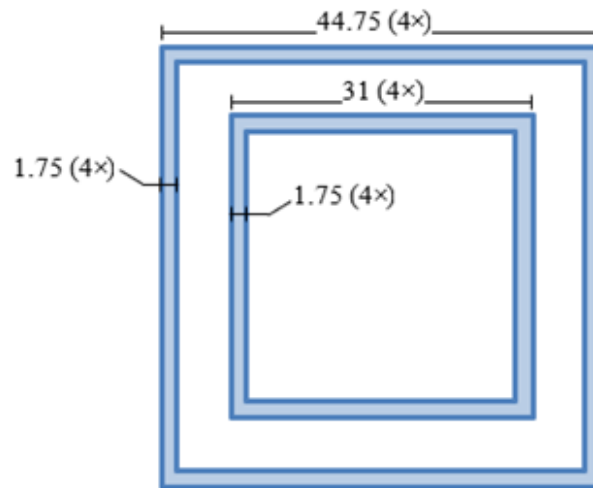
Pads (Dimensions in Inches). Height (z dimension) is 0.5 in. Figure is [HEU-MET-INTER-011](#).
